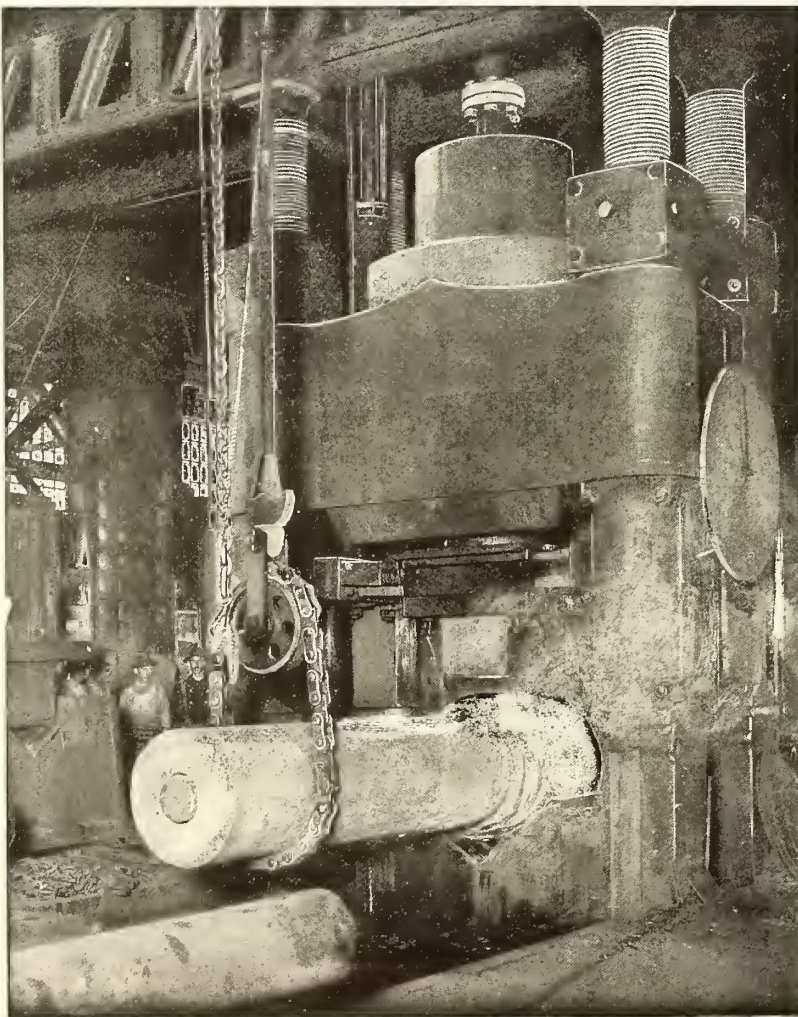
SHAFT UNDER HYDRAULIC PRESS.
